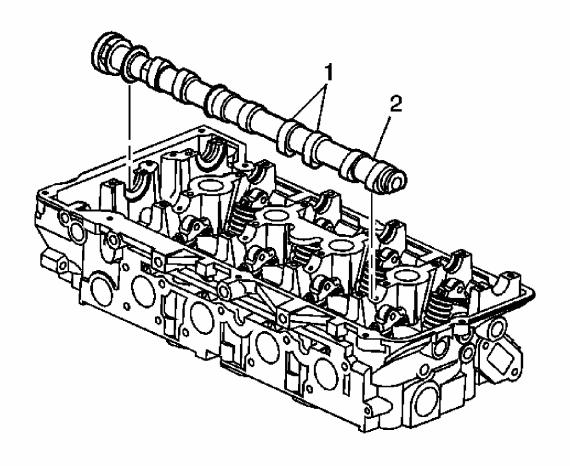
Identifying Camshaft Lobes & Journals Courtesy of GENERAL MOTORS CORP.
